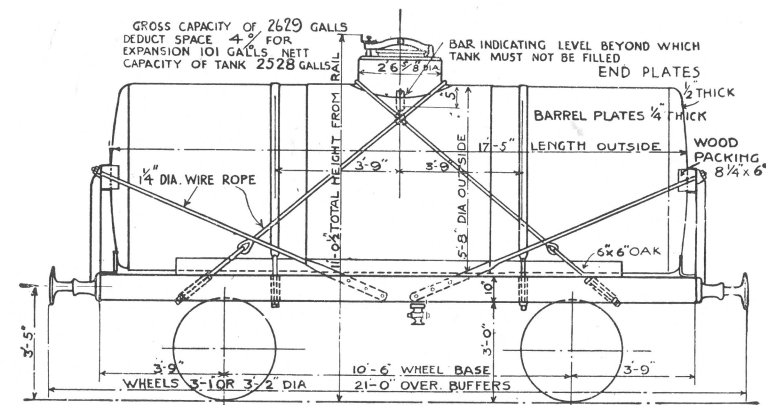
Private Owners' Standard 10- or 12-ton Cylindrical Tank Wagon (side elevation)
